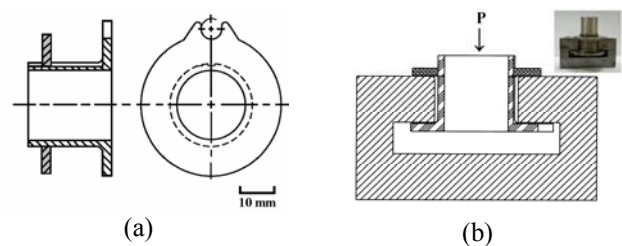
Schematic illustration of (a) belt pulley; (b) bon-ding force tester of belt pulley.
